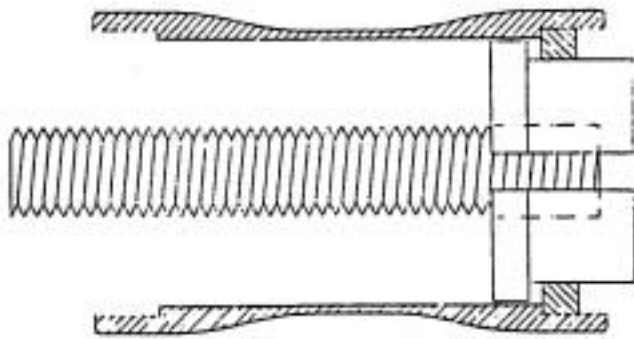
The bearing pusher halves inside the headtube. (Notice how the threaded rod separates the halves.)
